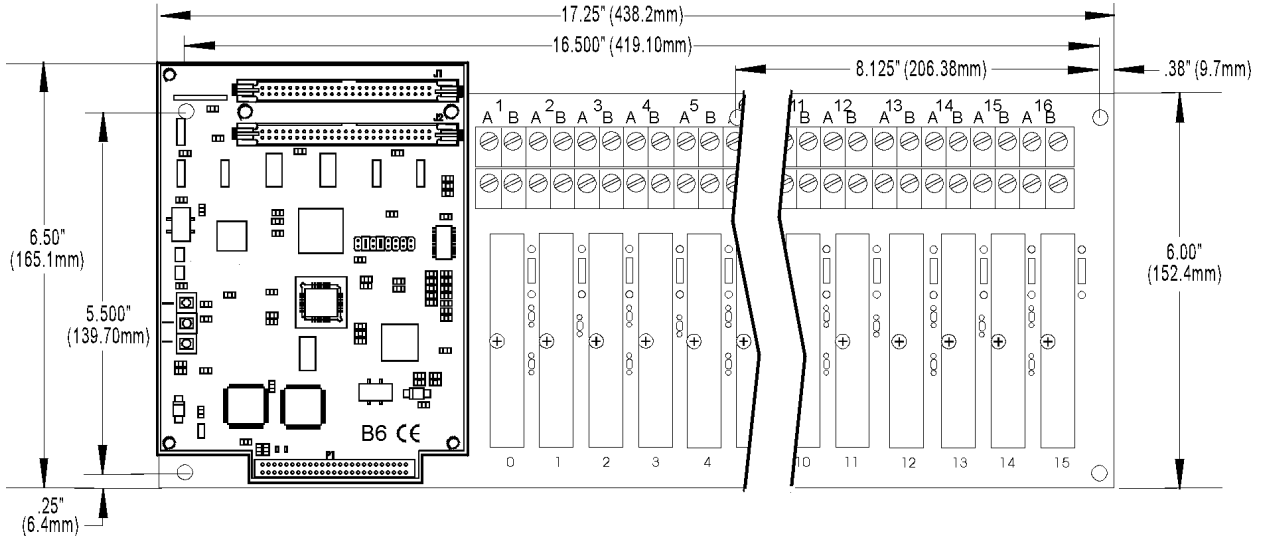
Mounting Dimensions of the PB16AH with a B6 Installed
